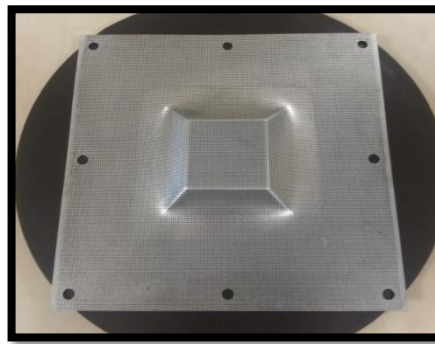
The deformed part with 10 mm diameter tool with grids.
